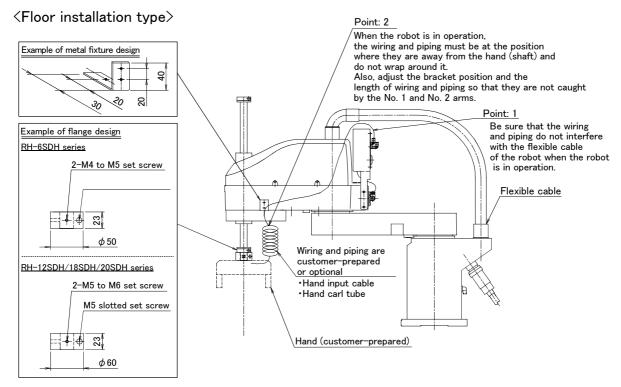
Example of wiring and piping <1> (Floor installation type)
